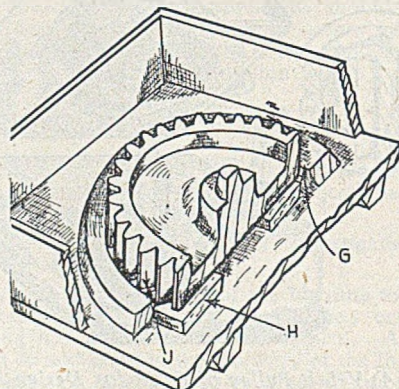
Moulding Set-up for the Gear-wheel Component on a "Flat-back" Board.
